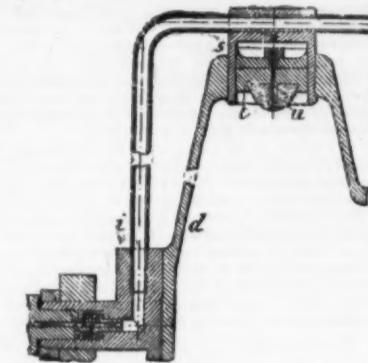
CHARGING APPARATUS FOR MORE THAN ONE BOTTLE.
